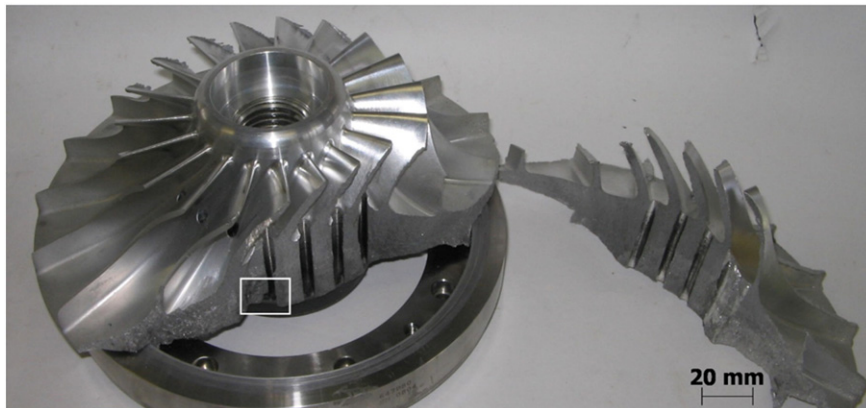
Turbo impeller rotor fractured during operation. The white rectangle indicates the partially drilled hole.
